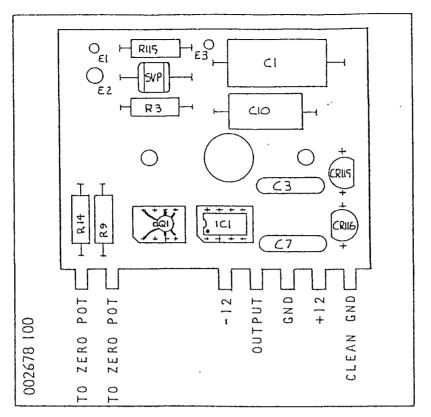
LOCATION OF COMPONENTS ON ELECTROMETER P. C. BOARD
